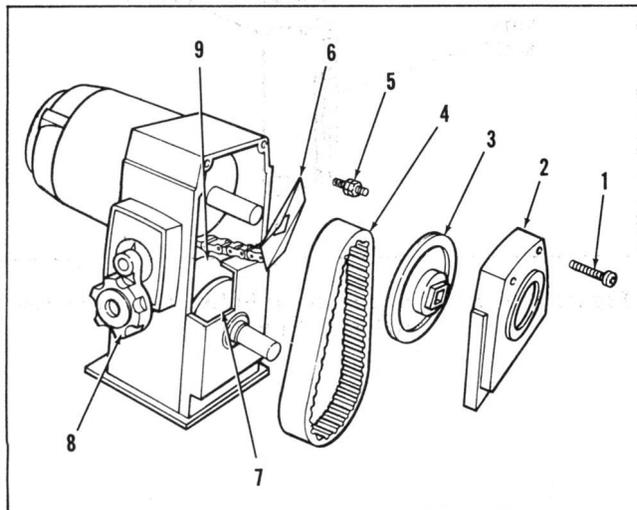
Replacing Varibelt in Variable Speed Drive Assembly
